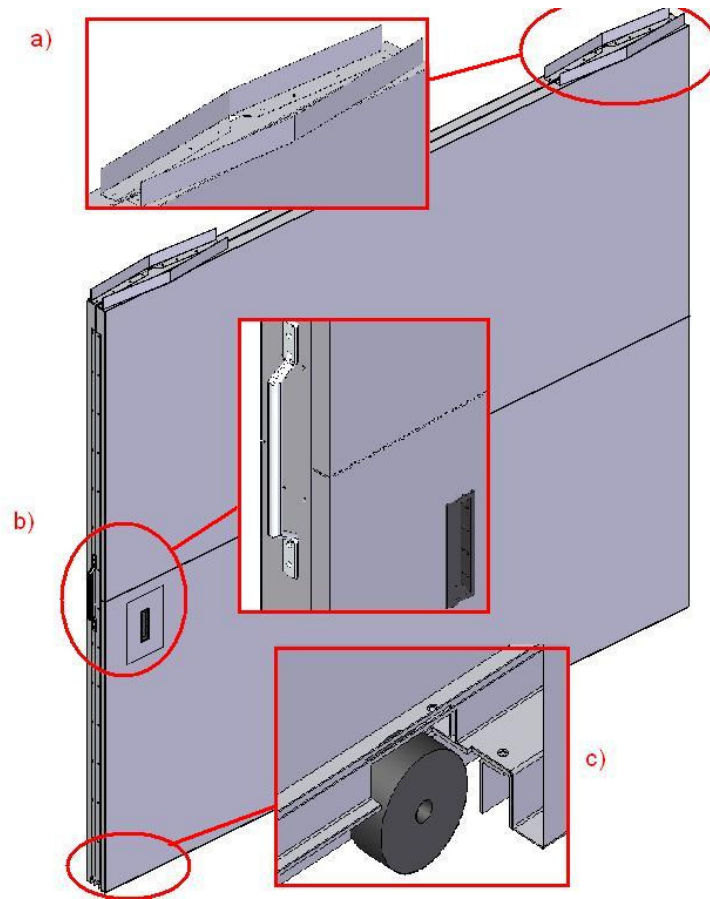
Main door detail. a) balancing pieces b) handles c) cut-away showing wheels
